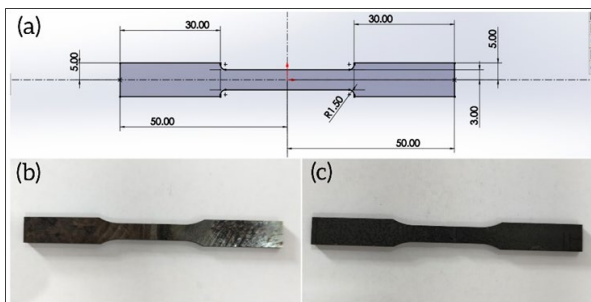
(a) CAD model (b) Without PWHT Tensile sample (c) PWHT Tensile sample.
